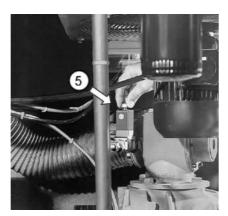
Solenoid valve on the suction controller with the cap nut screwed on
